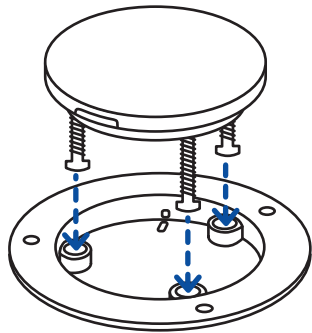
The screw heads of the ChargeSpot should be placed in the holes of the mounting plate.
